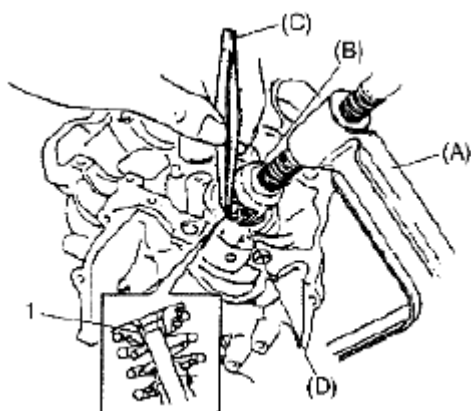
Identifying Valve Spring & Spring Retainer
